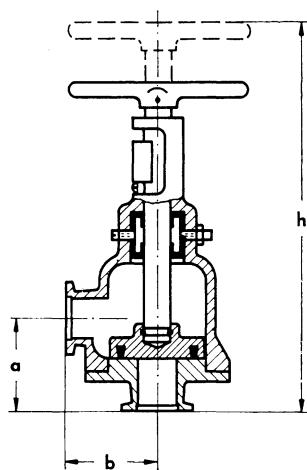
Dimensions of right angle disc (plate) valves supplied by Leybold⁷⁶² (Table 6.9)
